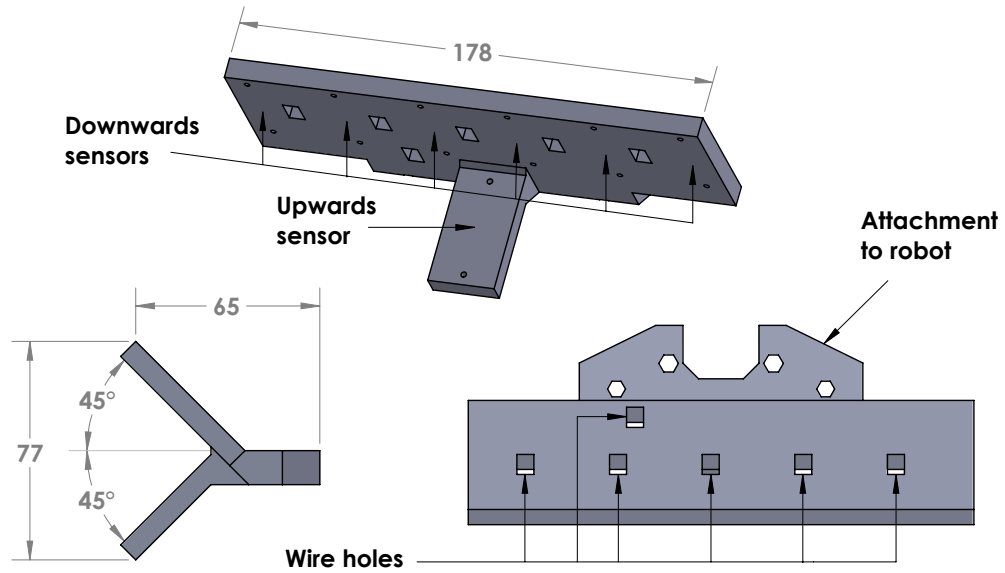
CAD model of Prototype 3 with dimensions [mm]
